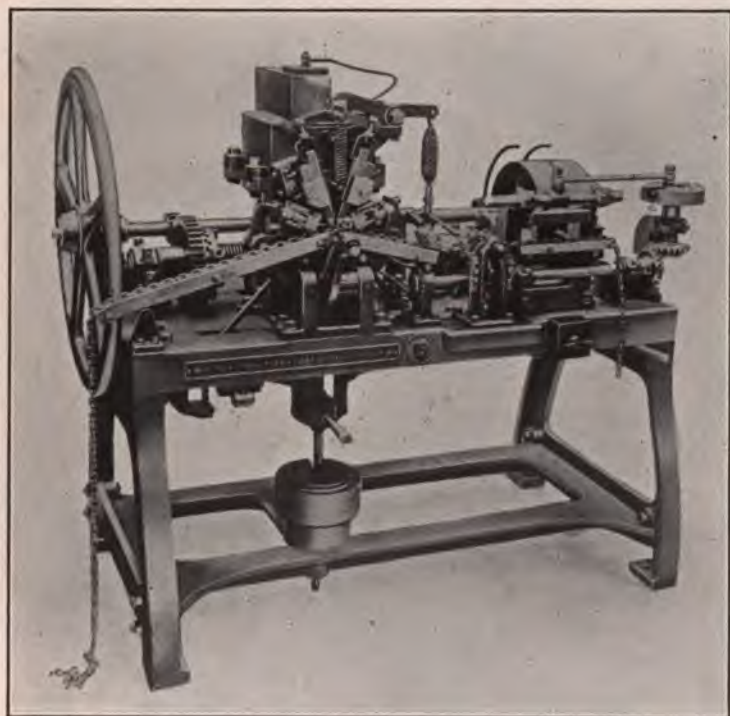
Automatic butt welding machine for manufacturing chains.
